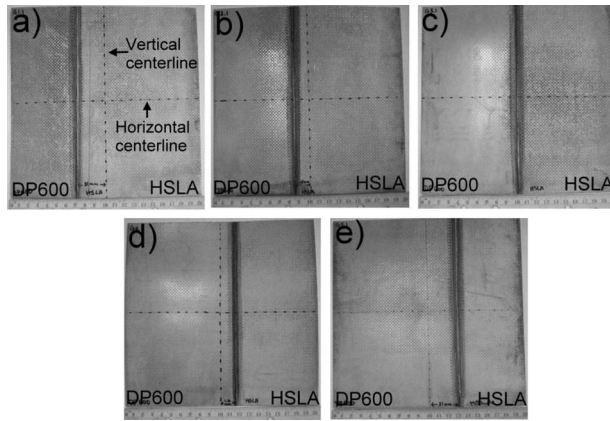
Laser welded blanks fabricated with different weld locations for biaxial-stretch forming tests: (a) -30 mm, (b) -15 mm, (c) center, (d) 15 mm, and (e) 30 mm
